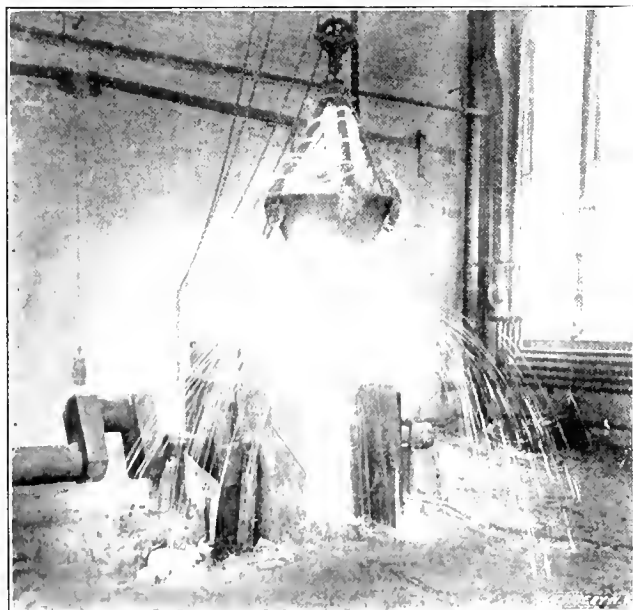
View showing the Thermit Steel running from the Crucible into the Mold built around the Fractured Web
